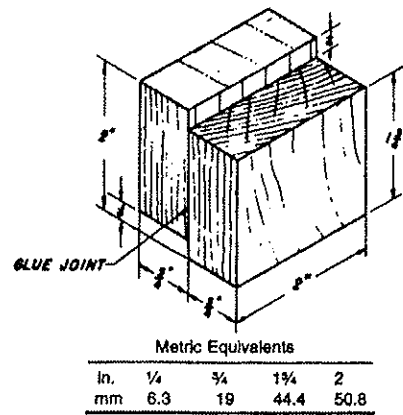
ASTM D 905-03 specimen to derive shear strength of bond lines [2]
